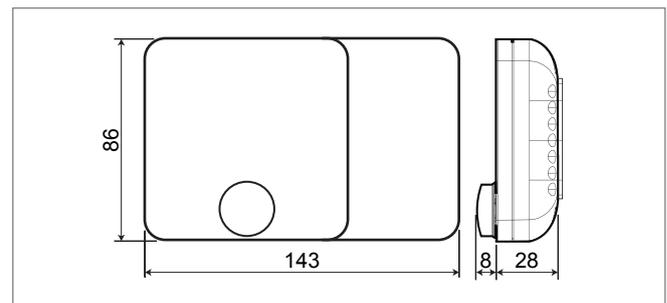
Dimensional drawing for the zone operator terminal for on-wall mounting (dimensions in mm)
